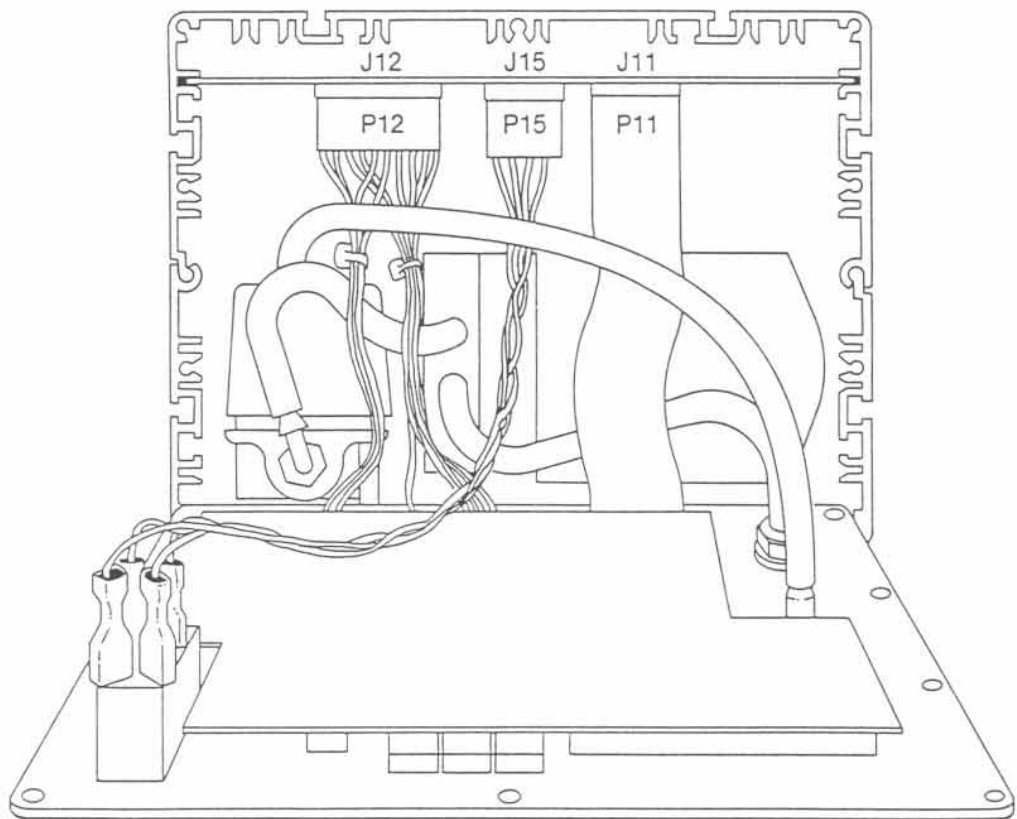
FRONT PANEL HARNESS & HOSE ROUTING
